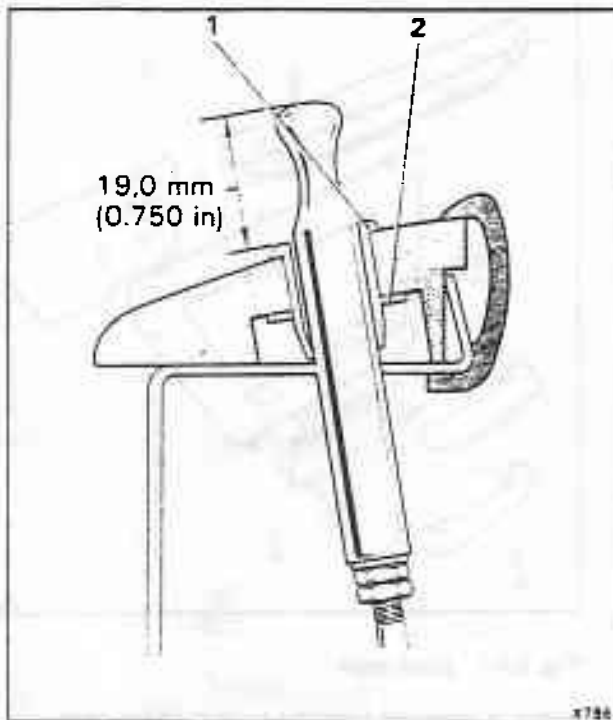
Correct fitting of guide bush and Starlock washer
